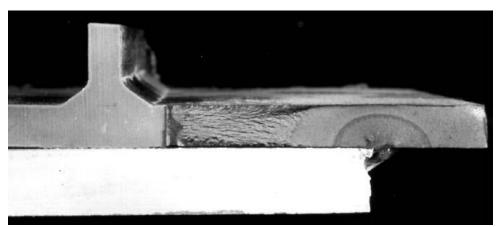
Crack Surface Showing Fatigue Crack Growth
